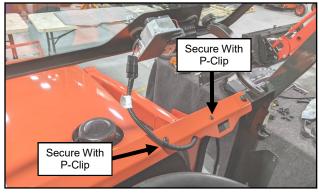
(Attach Main Harness To Wiper Connector)
